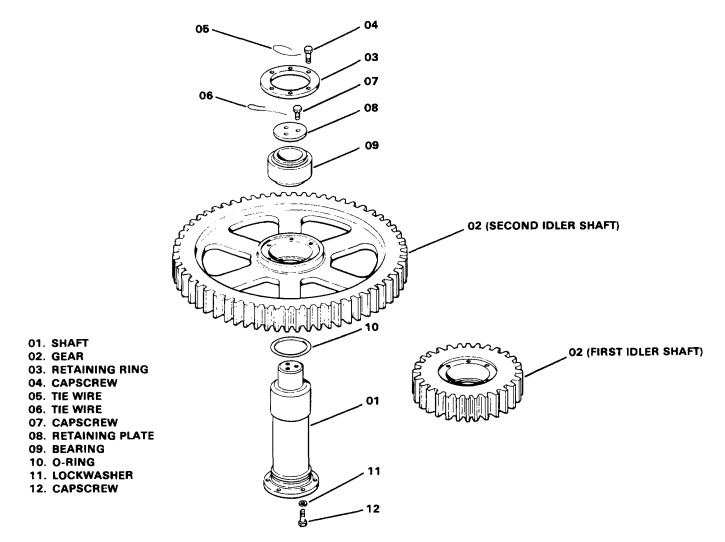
C-2. Swing Idler Shafts (910J354-1& 2)
